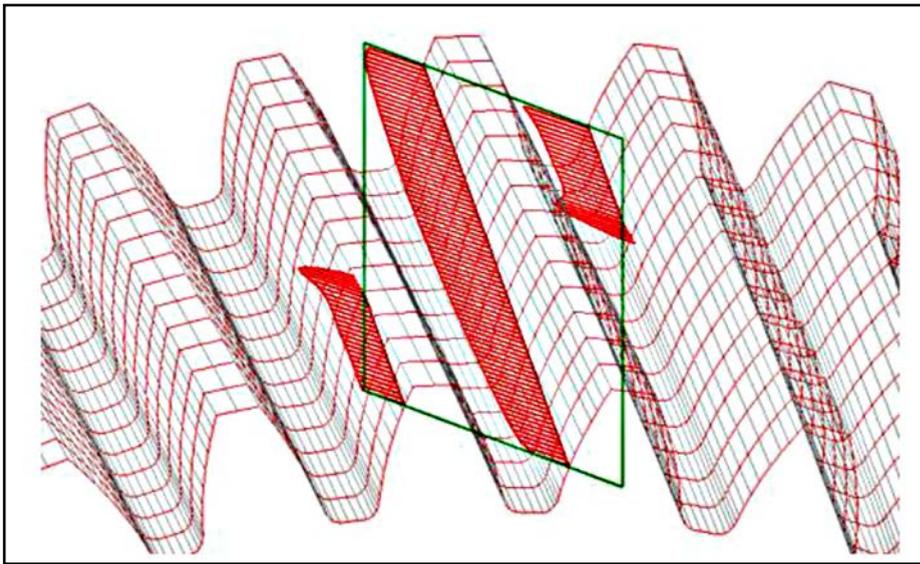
Line load in contact for a single gear side of a double helical gear [Ref. 2].
